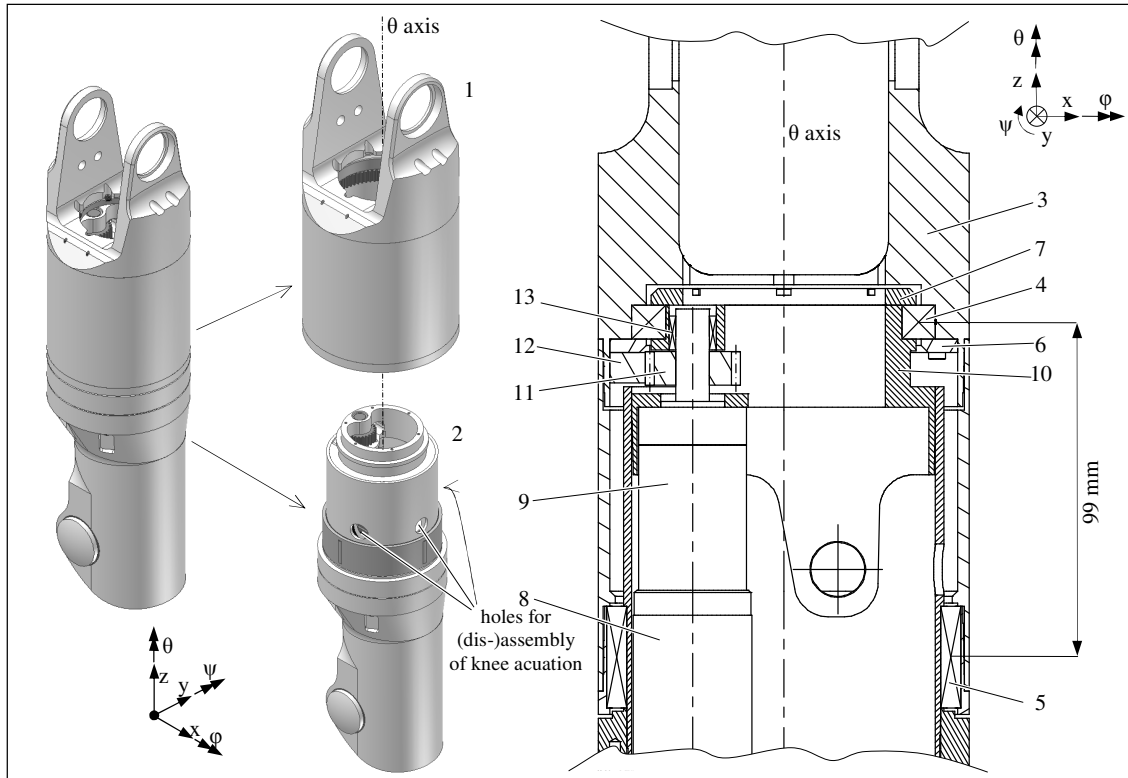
Assembled and exploded view of the upper leg with the thigh section (1) and the knee section (2) (left). A  $xz$ -plane section view (right) of the assembly of knee section into the thigh section; Thigh section (rough hatching), knee section (fine hatching), upper leg knee connector (3), crossed roller bearing (4), single row needle roller bearing (5) retaining rings (6,7), DC motor (8), planetary gearbox (9), motor bracket (10), pinion gear (11), ring gear segment (12), single row needle roller bearing (13).
